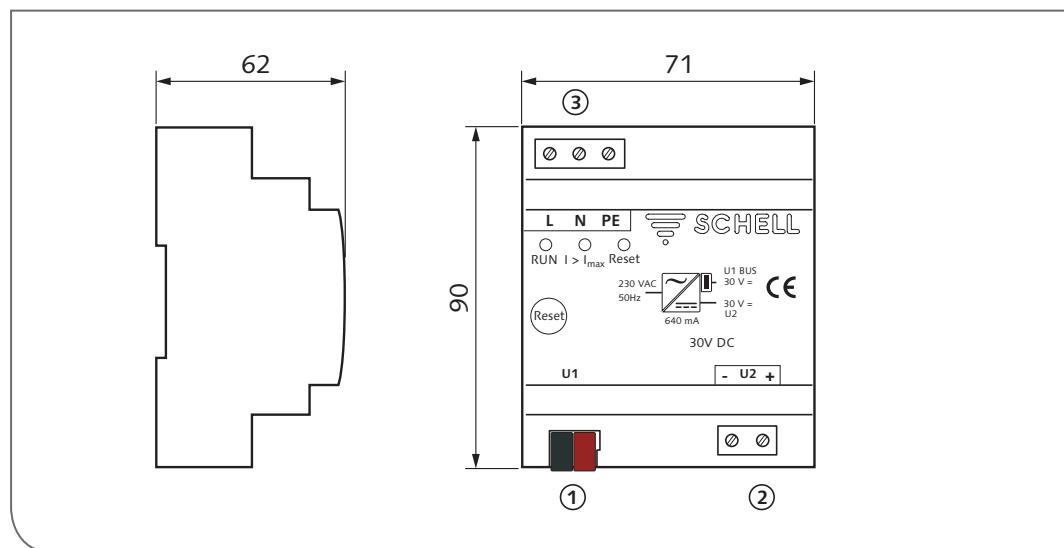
eSCHELL 30 V bus power supply unit — dimensions
